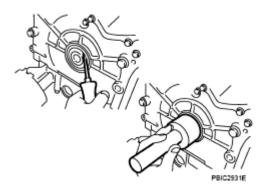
Pressing Front Oil Seal Using Drift Courtesy of NISSAN MOTOR CO., U.S.A.
